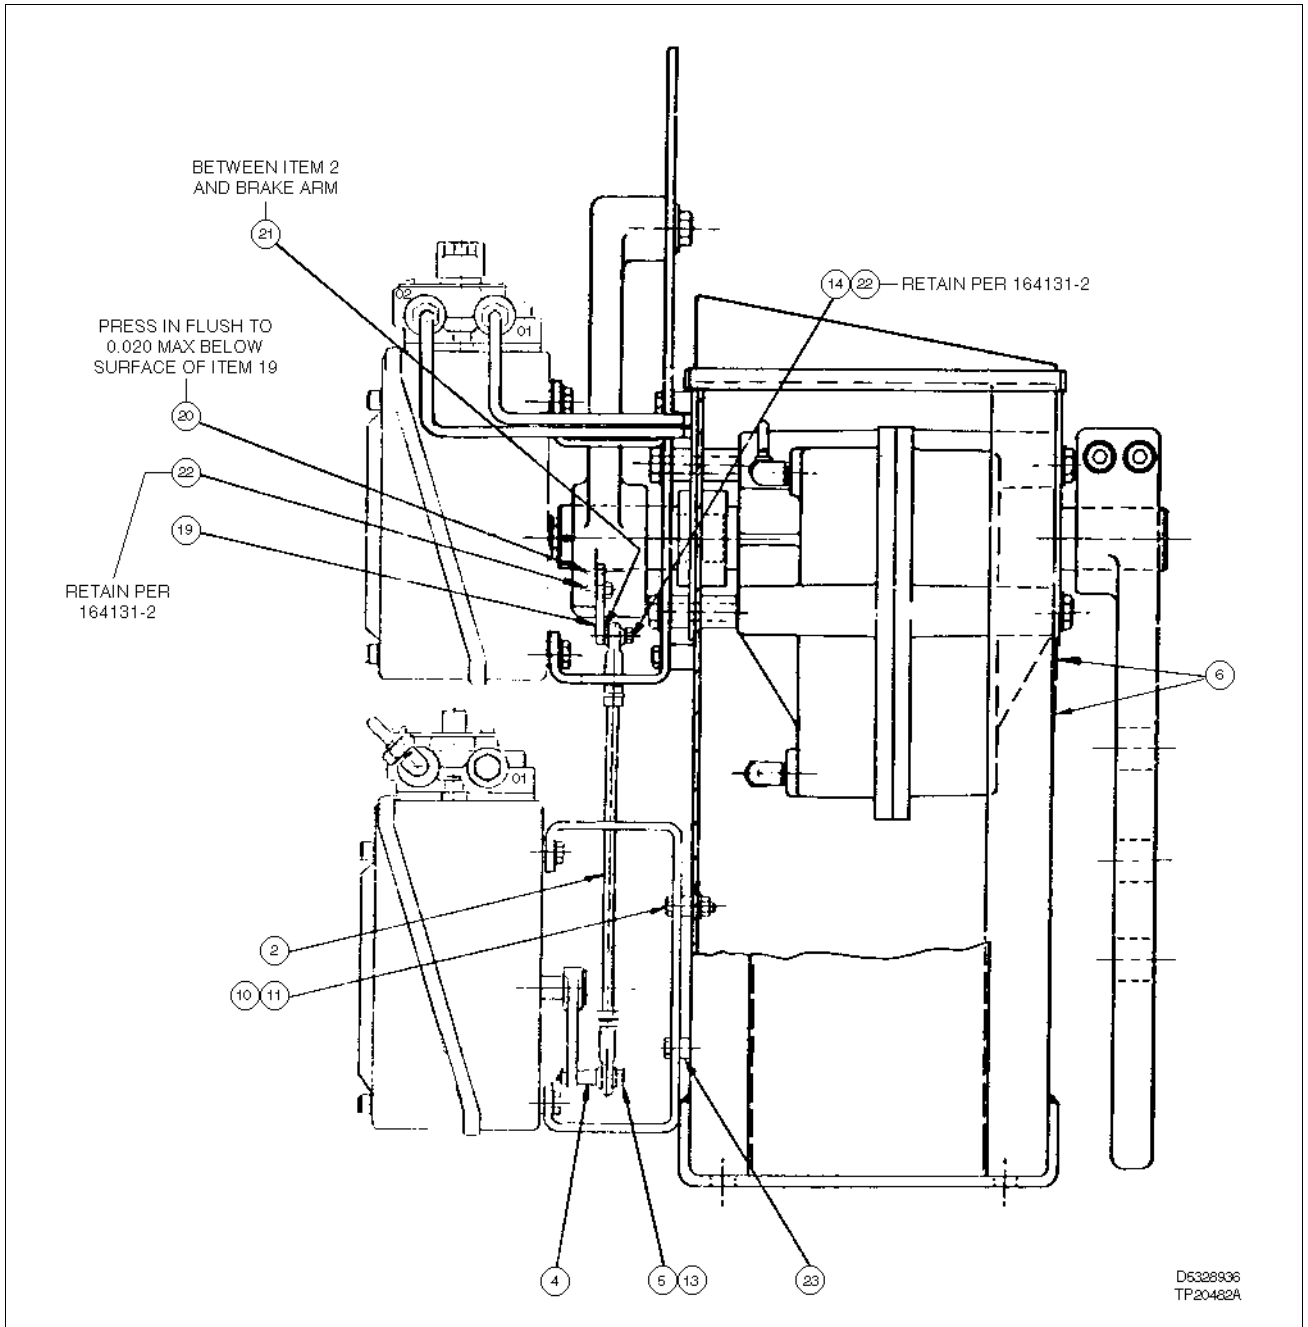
UP2 with Pneumatic Shaft Position Transmitter, Table A-15 (Sheet 1 of 2)
